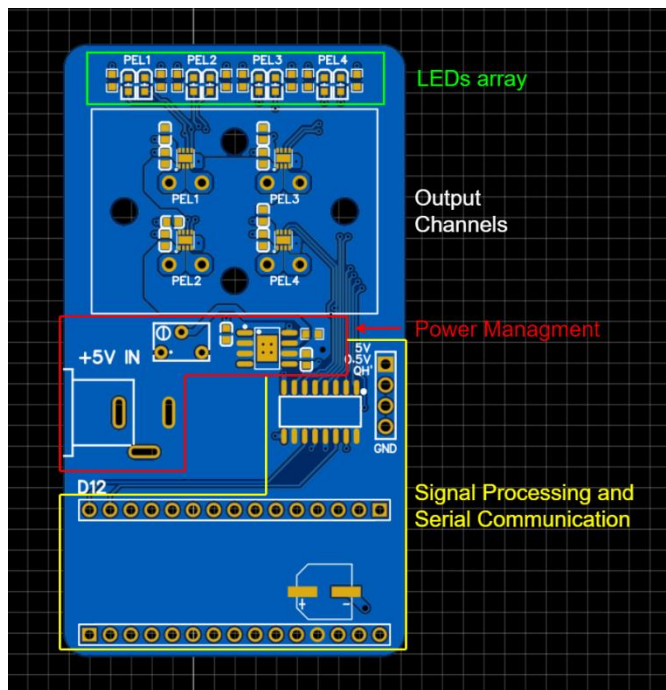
The PCB layout. The PCB consists of four main parts which are indicated by four different colour squares.
